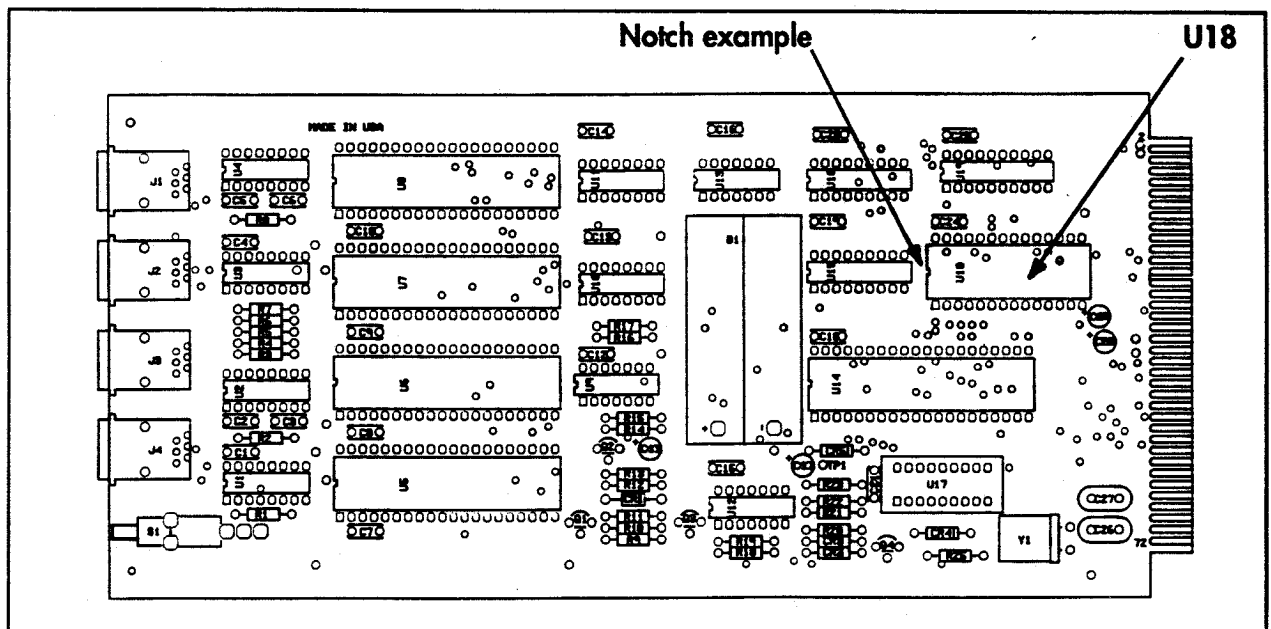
CM7501/CM7502 CPU Printed Circuit Board Layout
